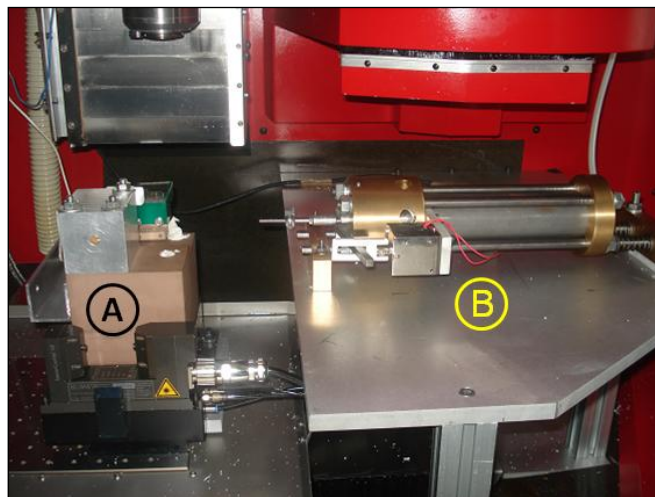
Overview of the micro QSD placed in the Kern EVO machining centre [A = tool holder block, B = percussion system] .
